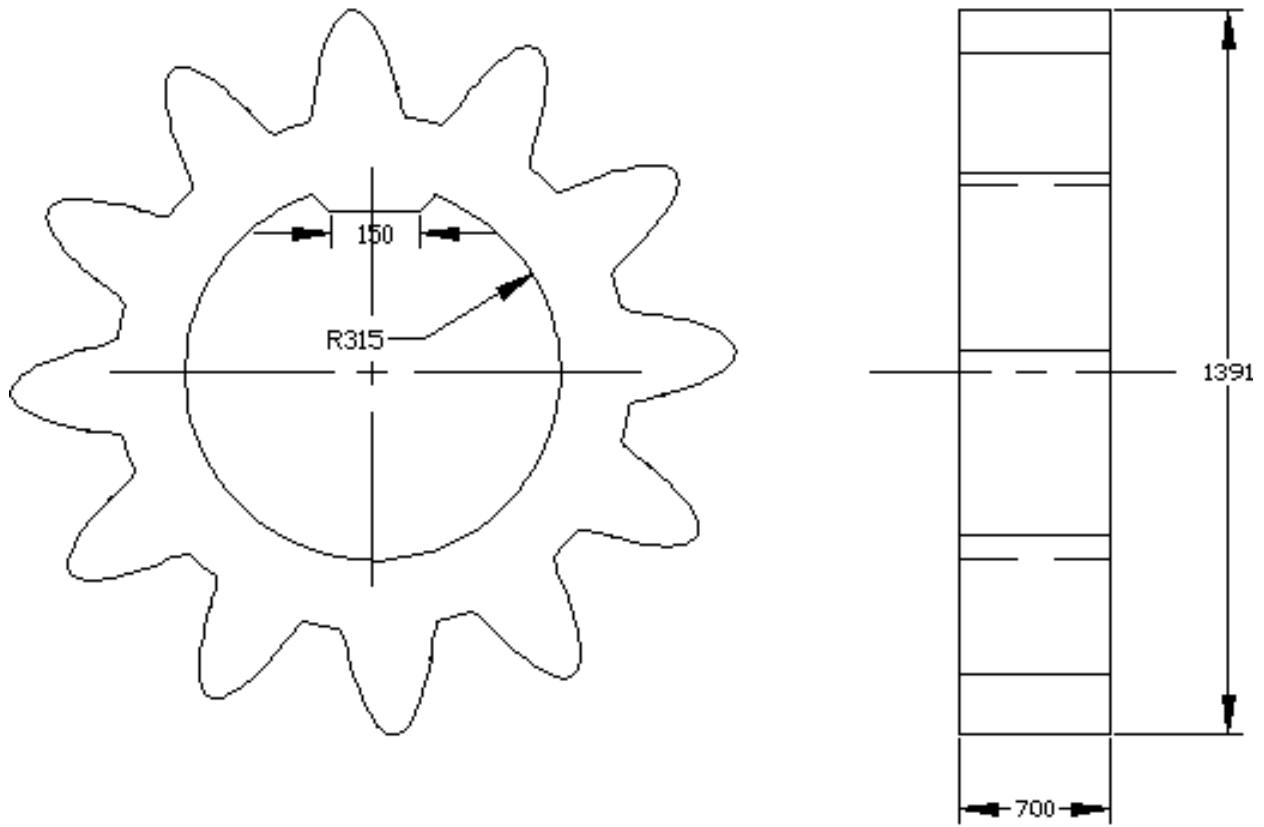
shows the sectional front view of the defective drive disc component and Figure 8 show the schematic diagram of the pinion gear which are manufactured by sand casting process (no-back system of mold making) from Manganese steel. The chemical compositions of the defective components are shown in Table 7. Sample pores were taken from the surfaces of the defective components. A total number of 100 pores were collected. The depth and diameter of the sample pores were measured by using Vernier caliper of 0.01mm accuracy. Pores were owing to a subsequent machining and grinding process after casting. The photographs of the surface of the defective components were taken with the help of digital camera. Then, images were imported into a personal computer and photographic analysis has given.
